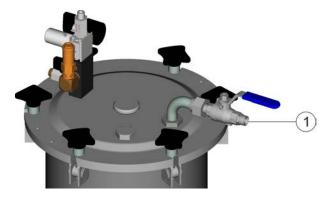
Disassemble material hose from the upper material outlet (type 2)
